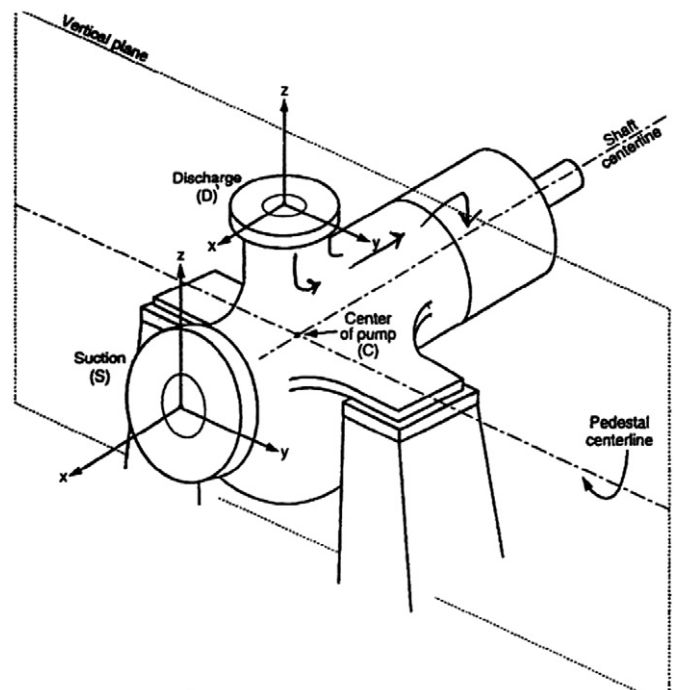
• Force path from excessive discharge flange loadings to the bearing bracket (Courtesy of API)
